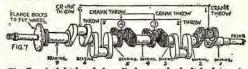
A right-hand six-cylinder crank shaft is determined by noting (from the front end of the shaft) the position of the center throws, 3 and 4 to 1 and 6. If they are to the right of 1 and 6, as shown in Fig. 7, then it would be a right-hand crank (view from front). Being a right-hand crank, therefore, it will fire 1, 5, 3, 6, 2, 4, or 1, 2, 4, 6, 5, 3.
